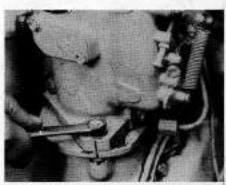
View showing timing mark alignment on fuel injection pump for 1190 models. Four cylinder model injection pumps are marked in same manner, however injection pump mounting and location are different.
